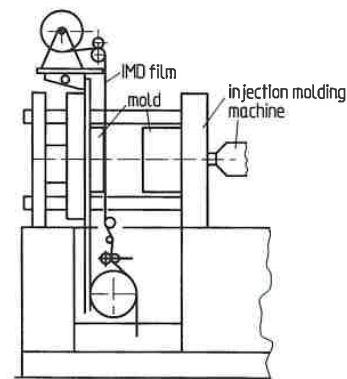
In-mold decorating setup with a foil-feeding device built into the injection molding machine [49]. (From *Injection Molding—An Introduction*, Pötsch, G. and Michaeli, W. (1995), Hanser, Munich, p. 175, Fig. 8.6.)
